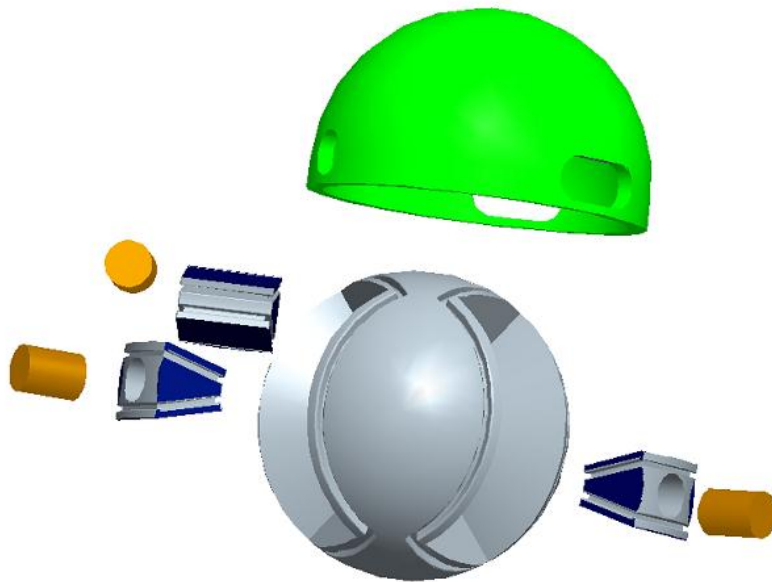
, Exploded view of assembly of the actuator having grooves for rubber sealing
